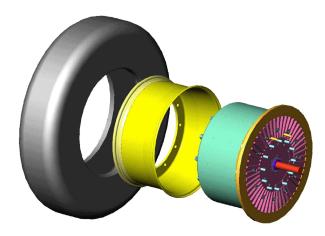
Wheel motor design - main components (from left: tire, rim, wheel motor) (e-Traction 2010)
